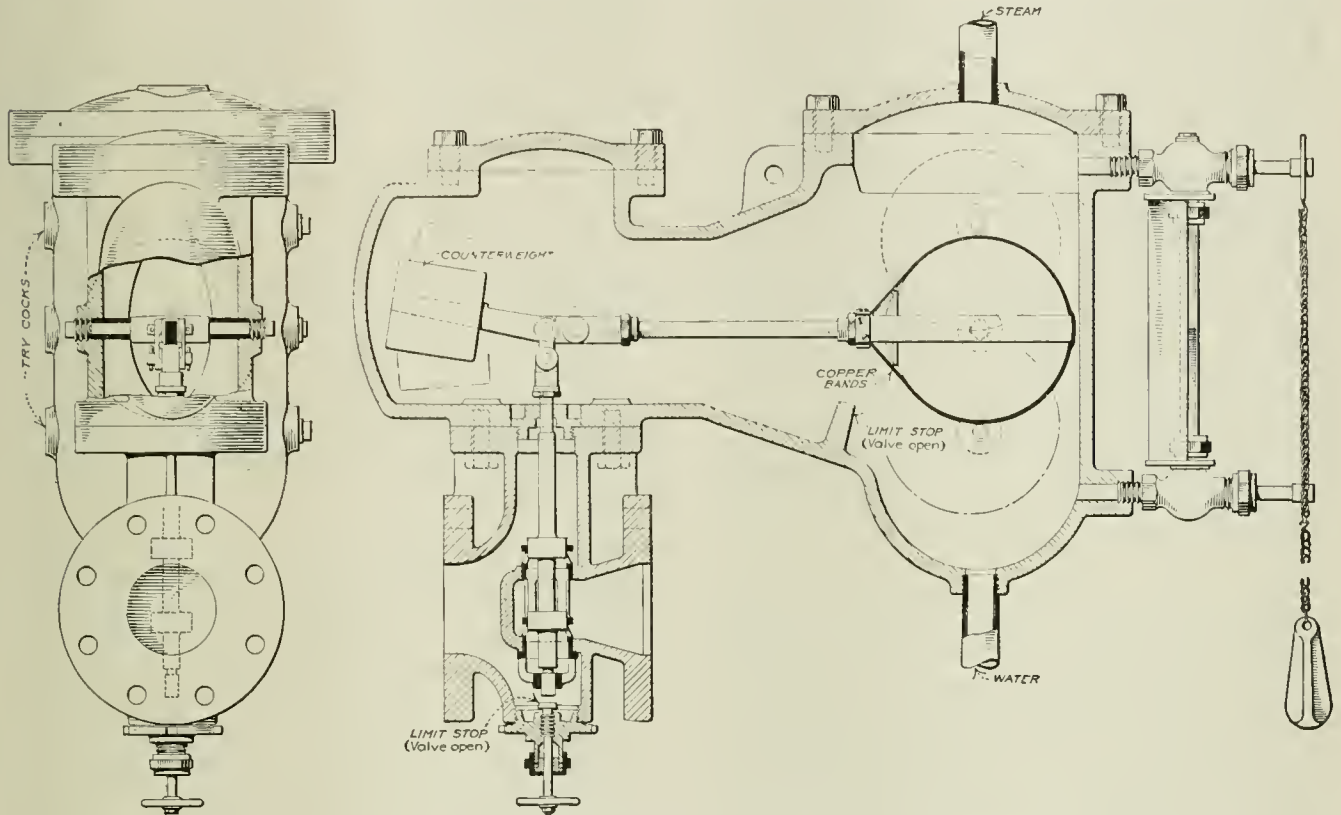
END VIEW AND SECTION THROUGH TYPE-B CONTROLLER
